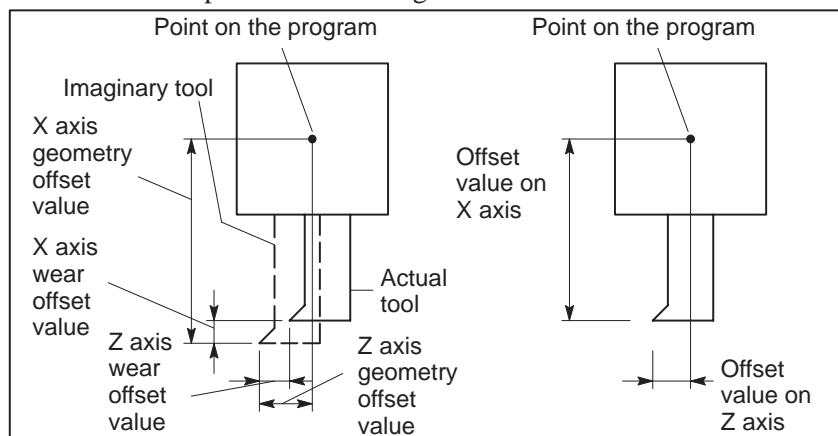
(a) Difference the tool geometry offset from tool wear offset
